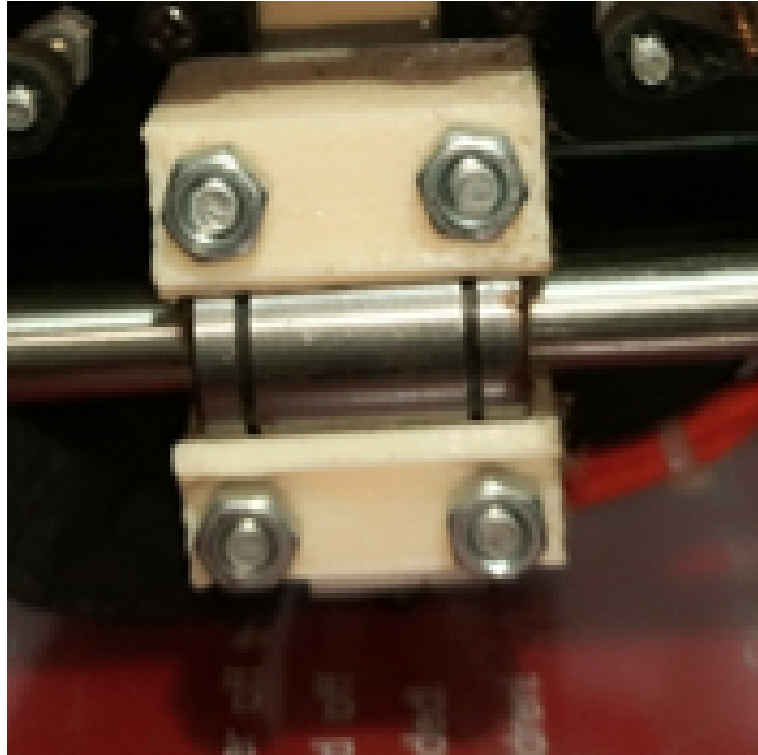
Linear Motion Ball Bearing Slide Bushing
